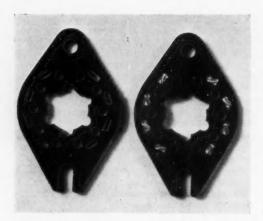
(Left) A Blank Panel. (Right) A Panel with the Tags Assembled and Clinched. The Tags are Delivered to the Machine in Strip Form
